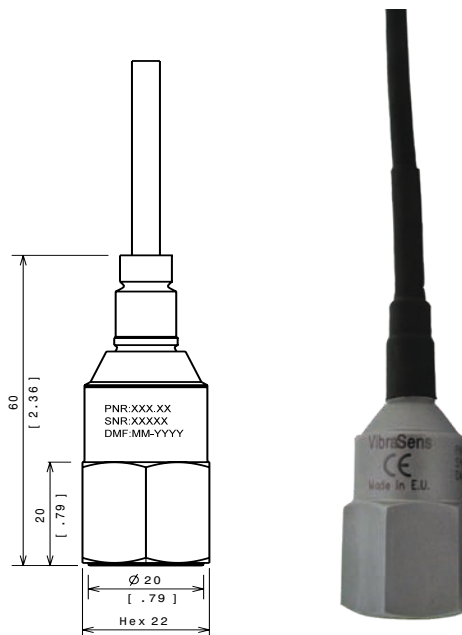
Outline drawing & Electrical layout, B=1 (MIL-C-5015)
